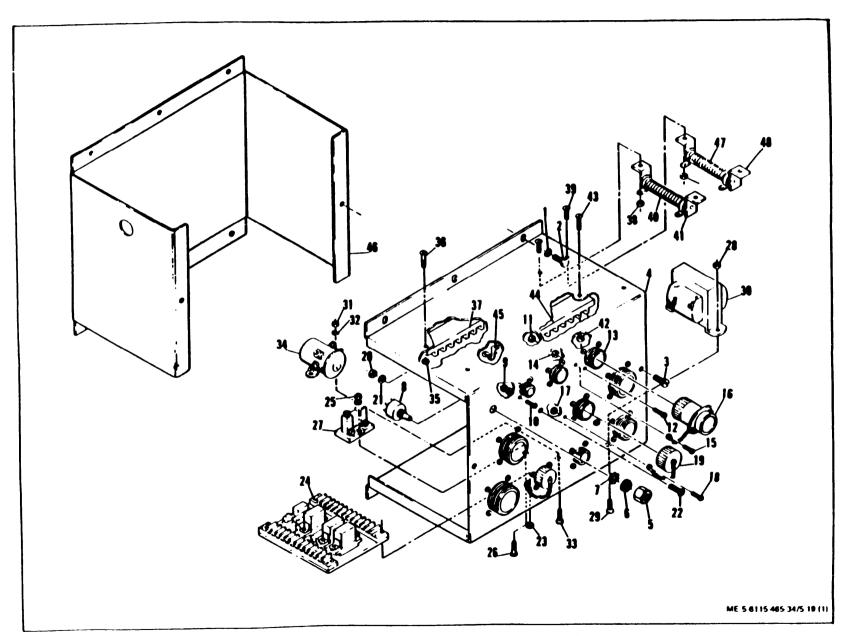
Special Relay Assembly, Exploded View (Sheet 1 of 2)
